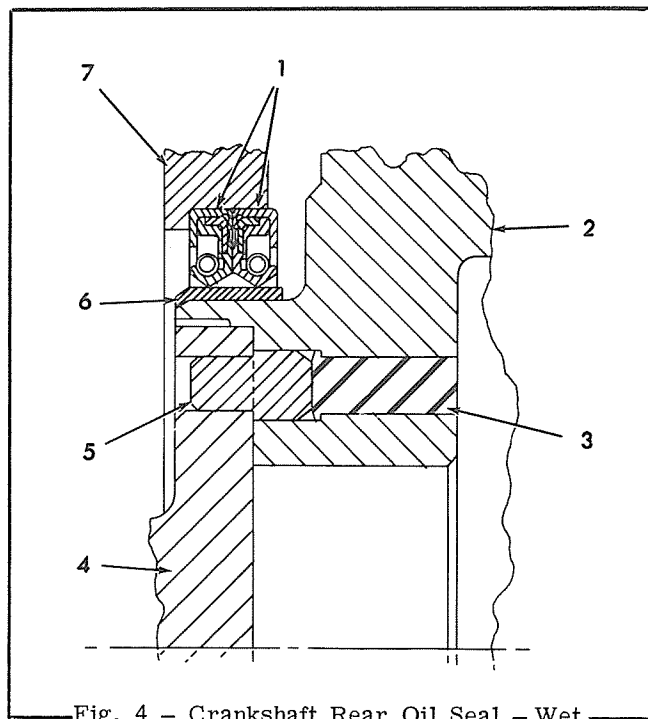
Crankshaft Rear Oil Seal - Wet
